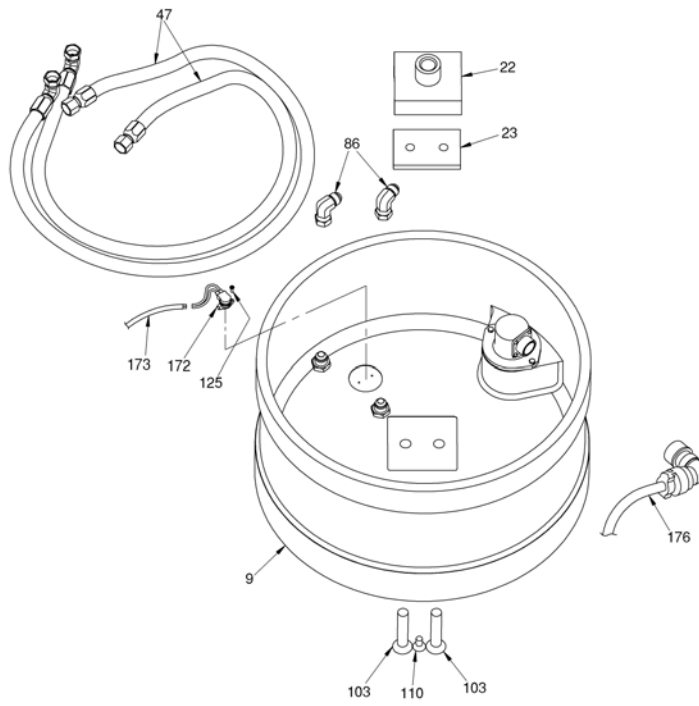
J. CMU Lower Frame and Chamber Subassembly.
